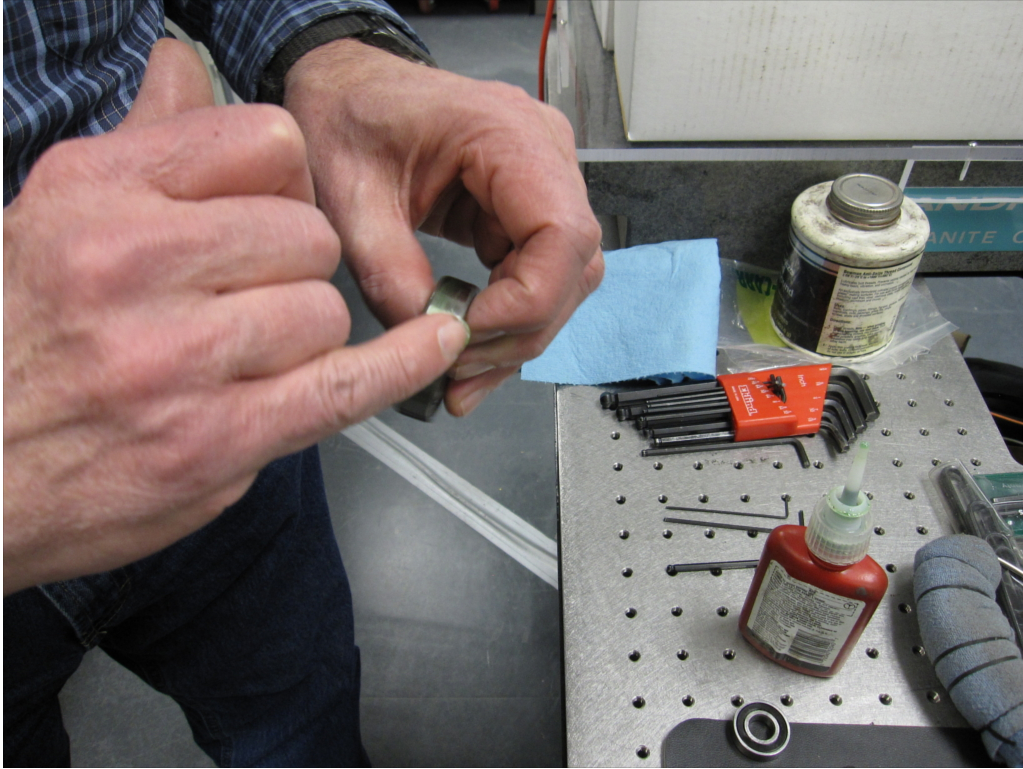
Applying Loctite 620 to the bearings holding the flywheel shaft in position.
